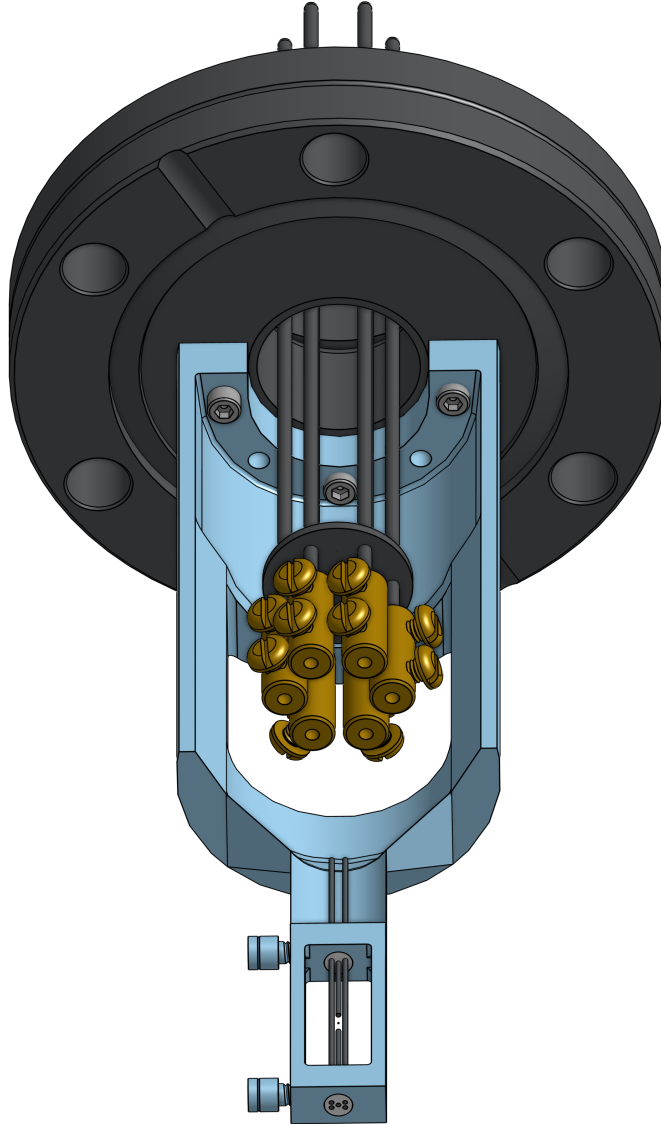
CAD model of the trap and its holder mounted to a single flange. The blue piece is the trap mount, which attaches to the flange. The actual trap is located near the bottom of the figure, with the rectangular pattern of the rods visible in the white circle at the edge of the holder. This gray circle is a Macor piece used to hold the rods and one needle in place. The other side of the trap has an identical piece that keeps the rods straight and holds the other needle. The side screws then hold that Macor pieces in the trap holder. Not shown are the connections from the rods to the feedthrough pins. In the actual setup, the barrel connectors shown in the figure in gold simply screw directly onto the trap rods and needles.
